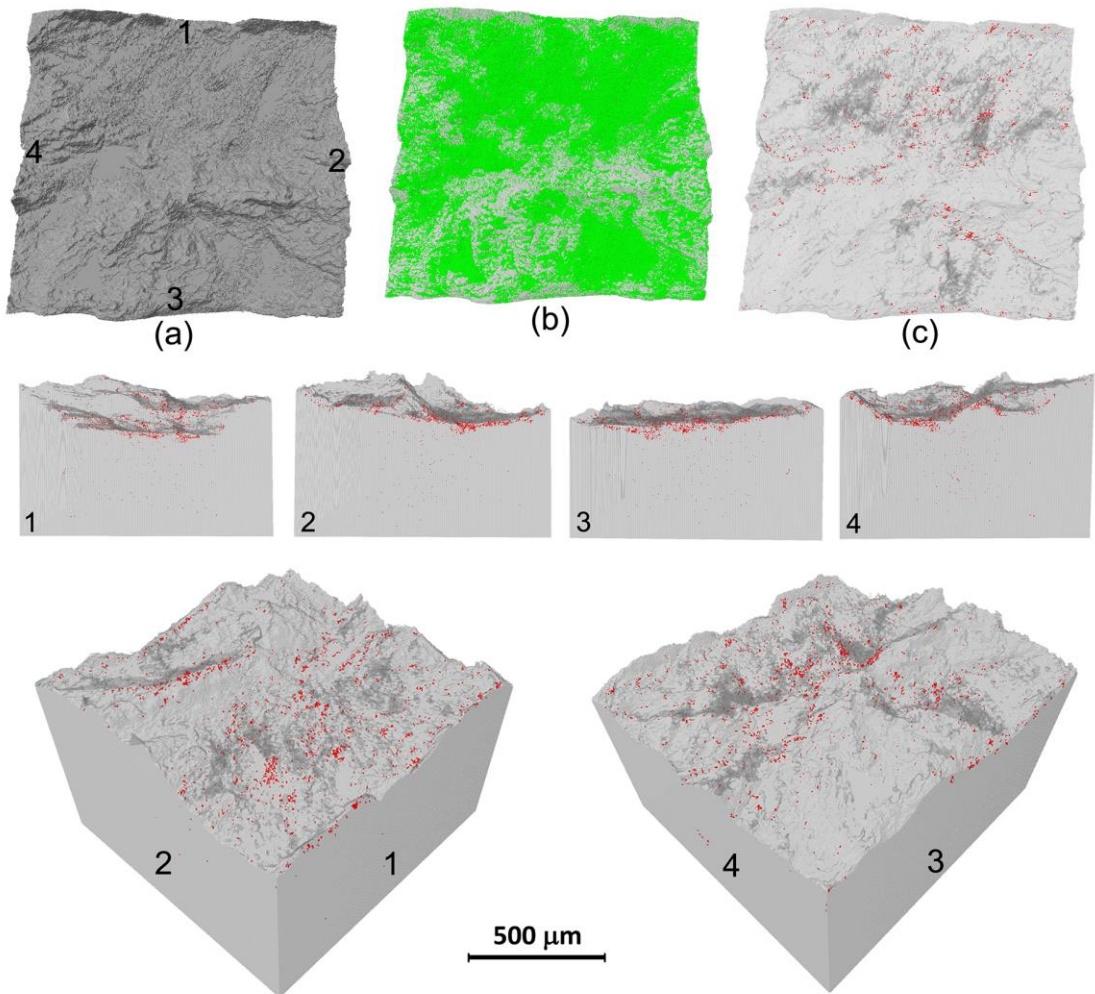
3D representation of the population of dimples or voids in fractured samples of DP-ref steel (a) fracture surface, (b) dimples on the fracture surface in green, and (c) voids beneath the fracture surface in red. The 3D model is presented from varied views in the second row and 3D perspectives are shown in the third row.
